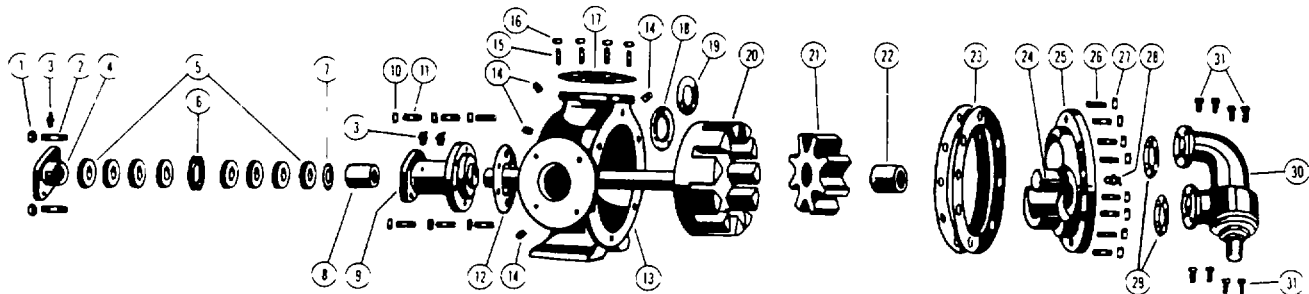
EXPLODED VIEW MODEL Q32, M32, AND N32 PUMP
